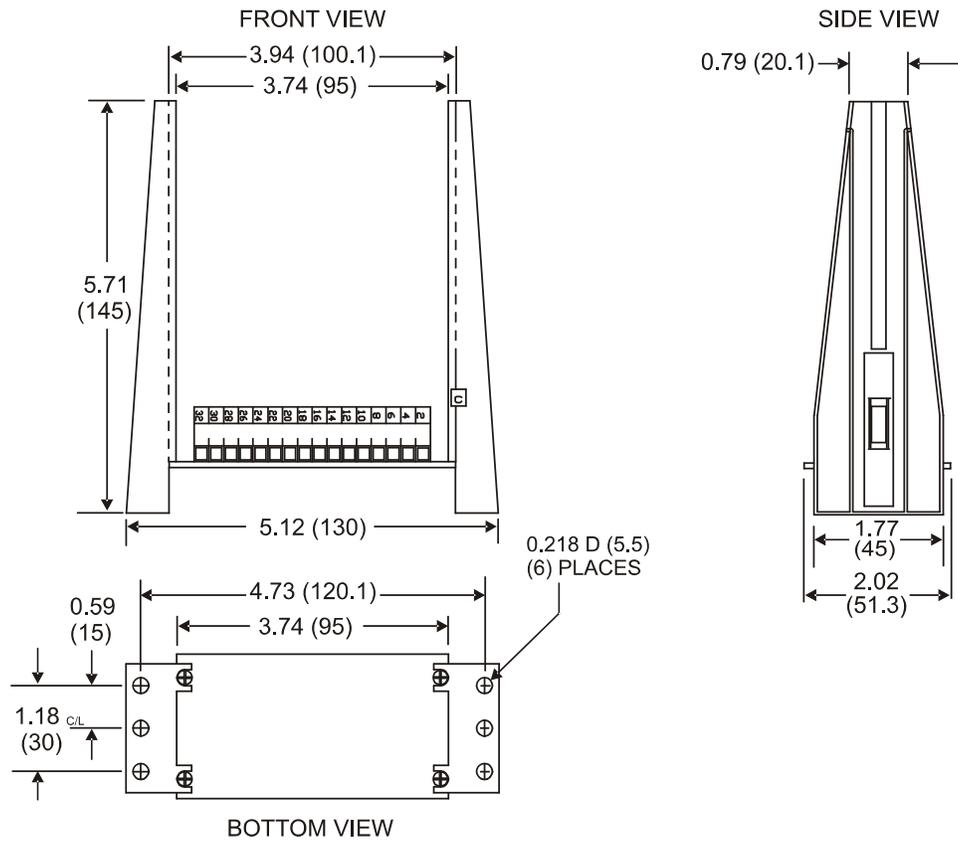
ACCESSORY PLUG-IN CARD ADAPTER DIMENSIONS
